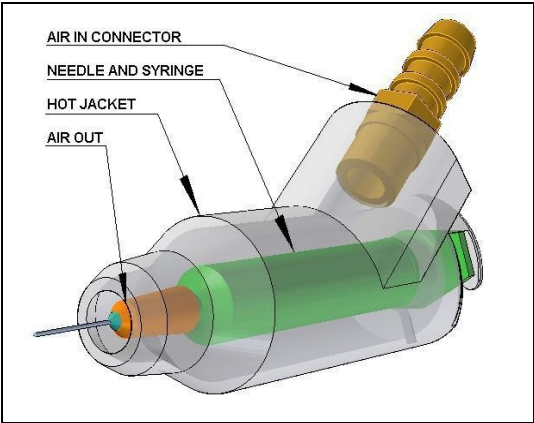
Hot-jacket assembly designed to maintain needle and syringe in excess of 70 °C (front view)
